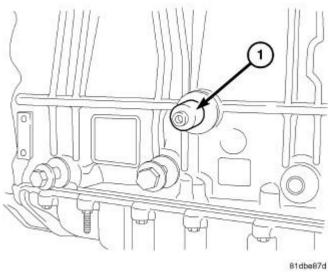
Crankshaft Locking Tool Courtesy of CHRYSLER LLC
